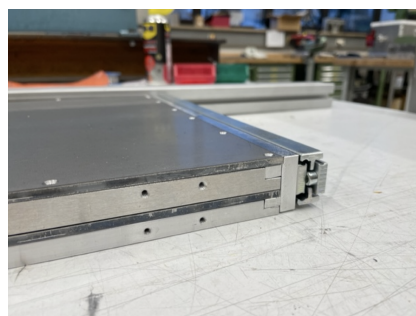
Assembling the drawer side parts, exemplarily shown for the right side part.
